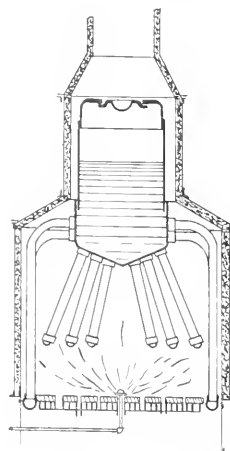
Ward Navy Launch Boiler Fitted With Oil Burner.
